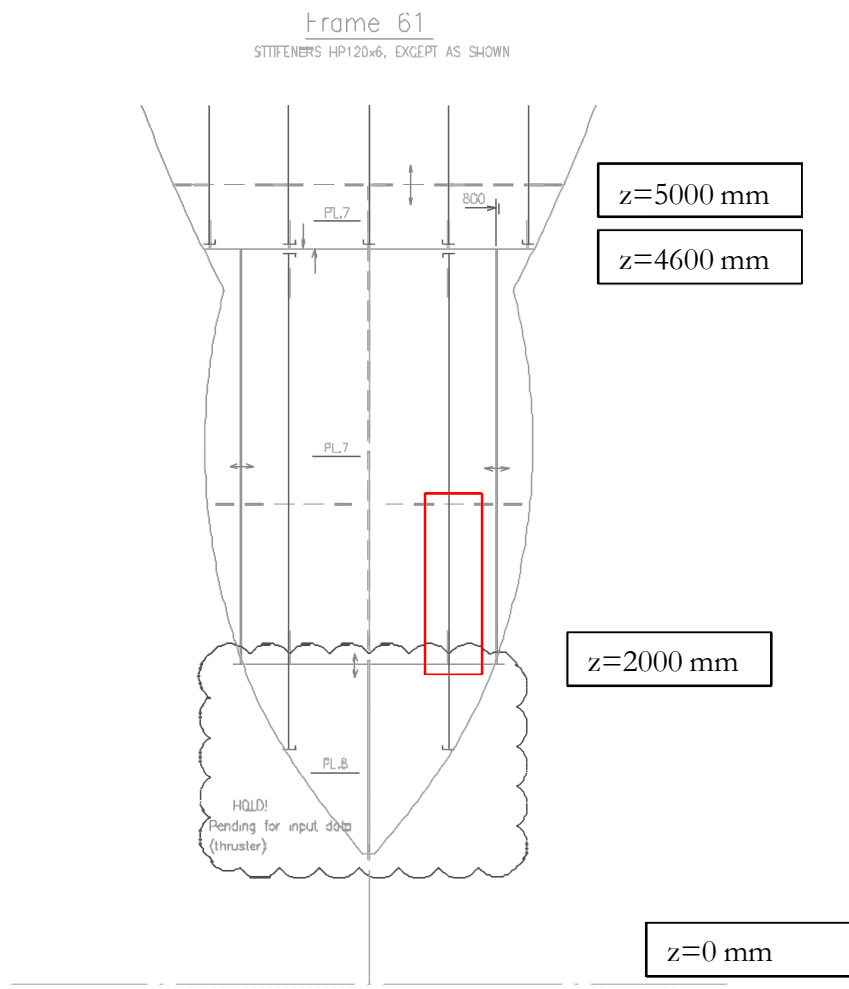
Frame #61 Bulkhead plate thickness and stiffeners size.
